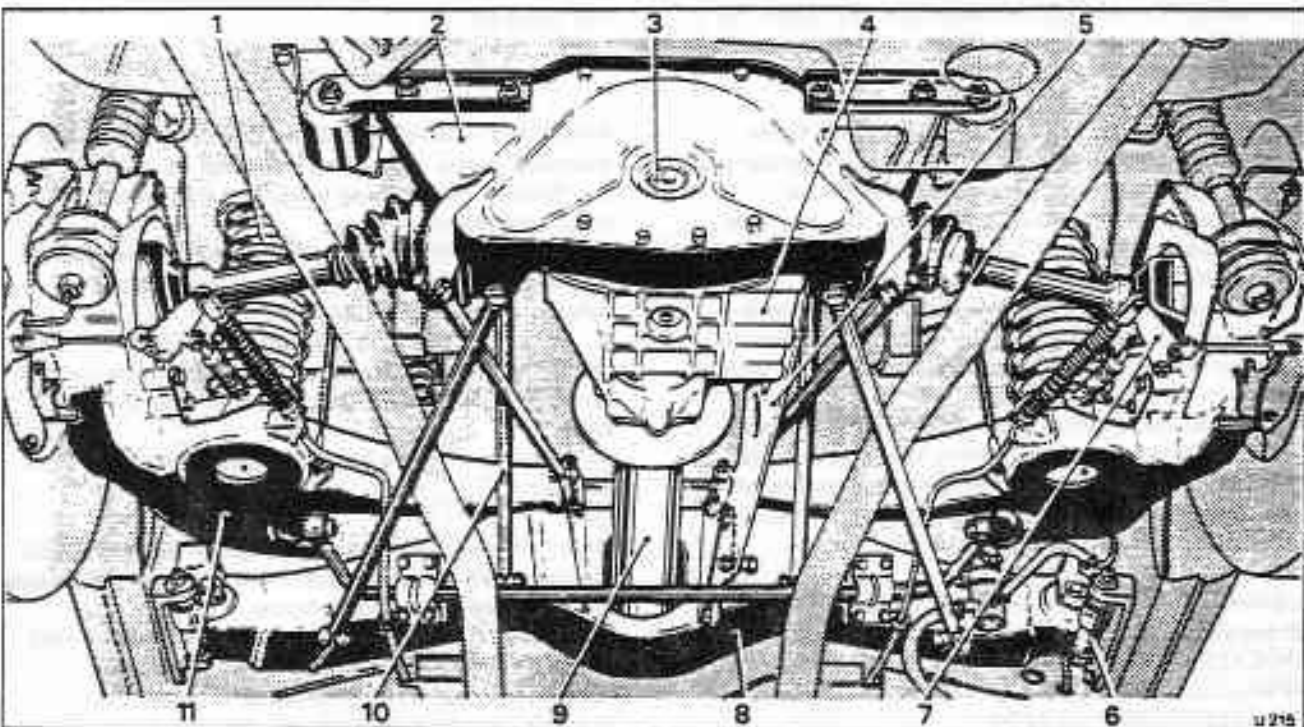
Final drive in position (cars fitted with ball and trunnion joints)
